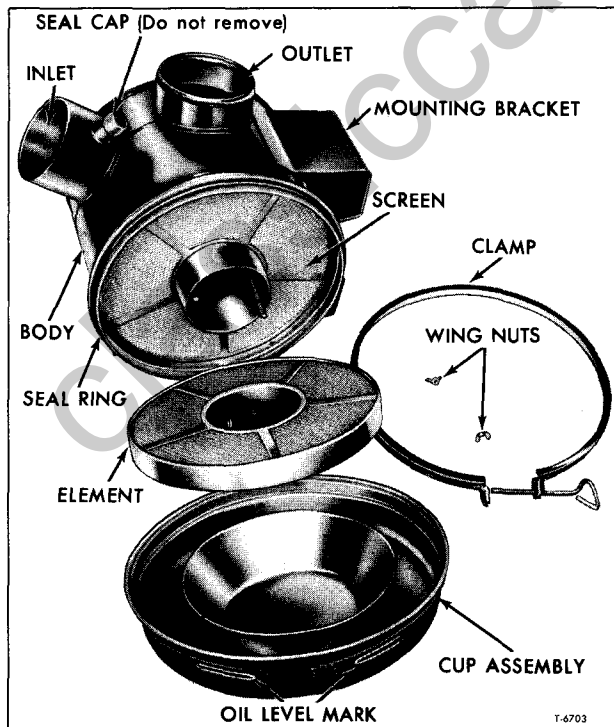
Oil Bath Air Cleaner (Typical for Diesel)
